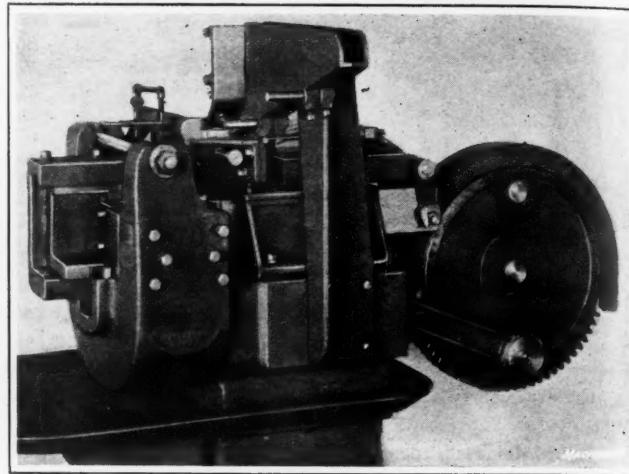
Machine provided with Magazine Feeding Attachment designed for handling Studs or Headless Blanks
